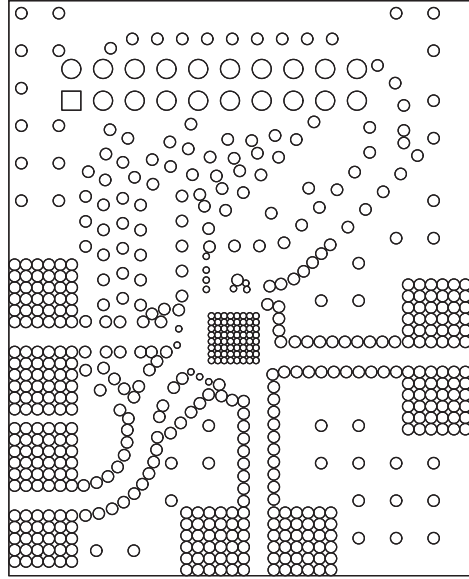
SKY66101-11 Evaluation Board Assembly Drawing
